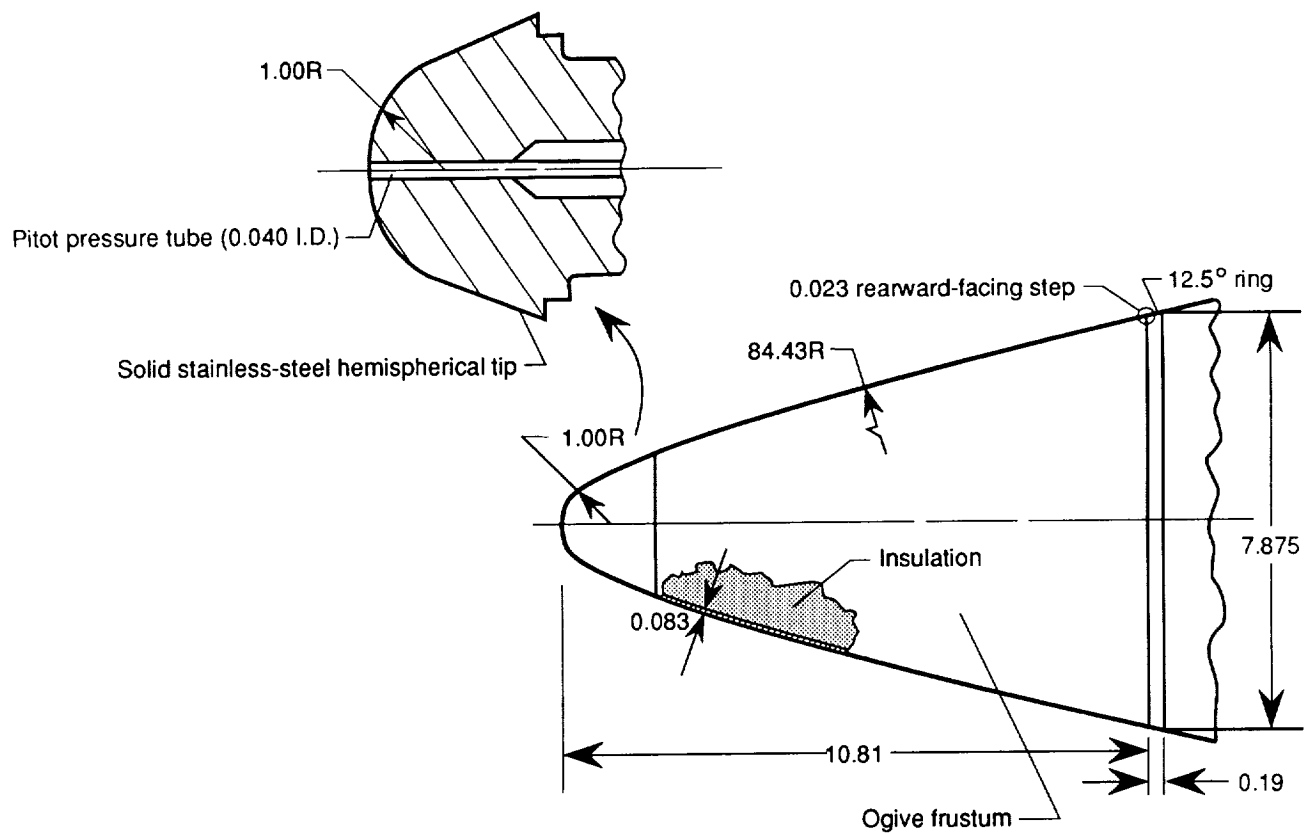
Schematic drawing of model assembly. Linear dimensions are given in inches.
